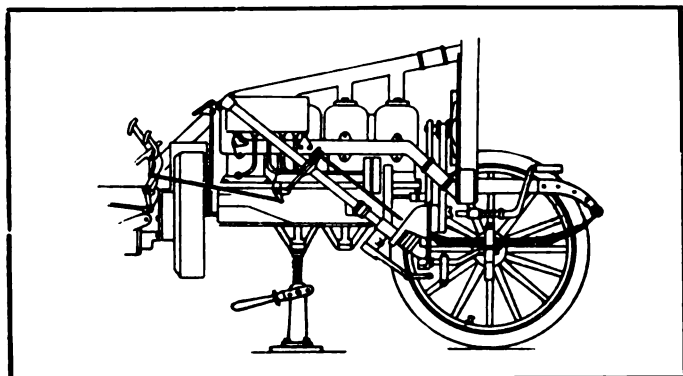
Determining Play in Main and Connecting Rod Bearings by Jacking the Crankshaft.
